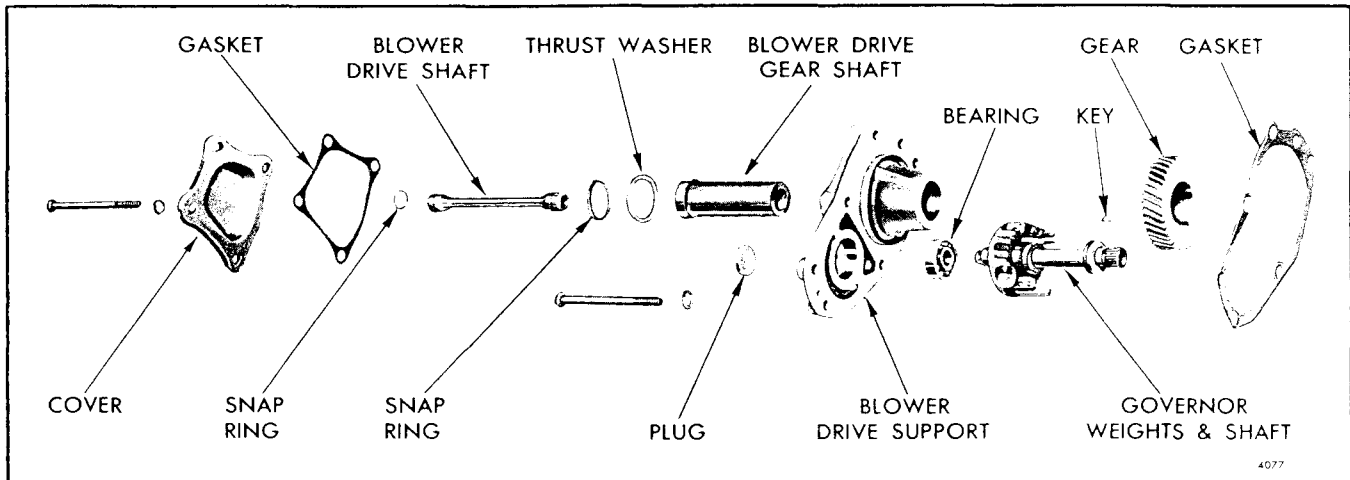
Blower Drive Support Details and Relative Location of Parts
